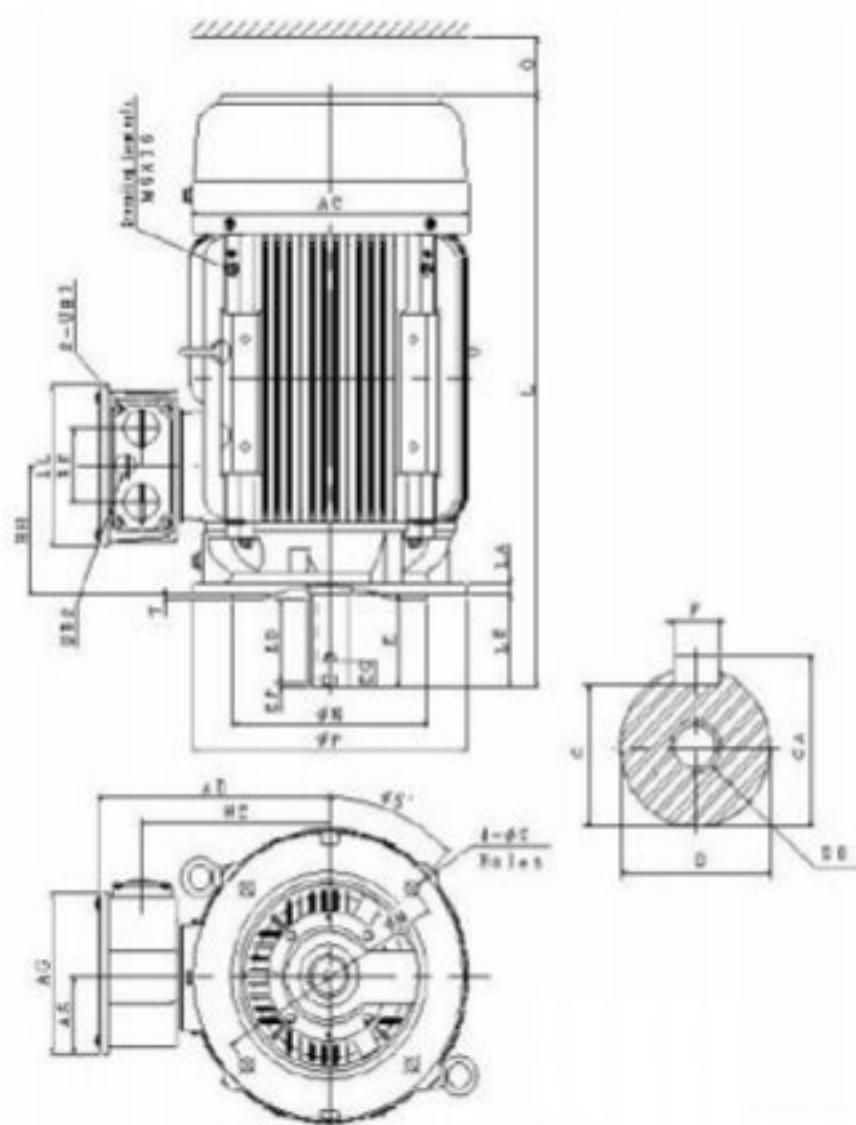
Outline drawing of cast iron design, mounting V1; frame size 180
